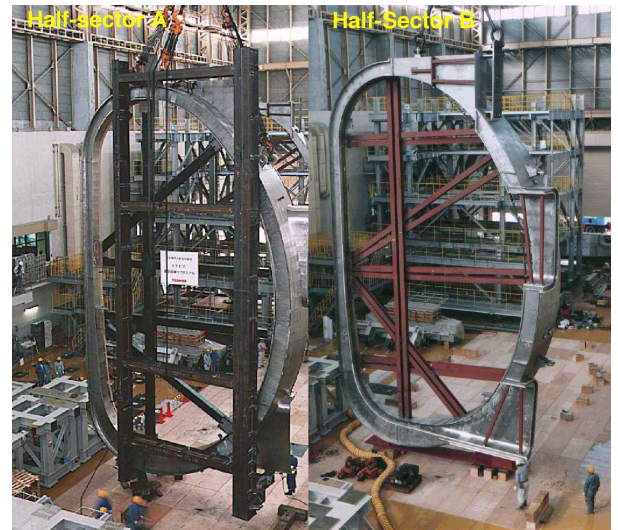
Vacuum Vessel Sector Halves prior to Welding
